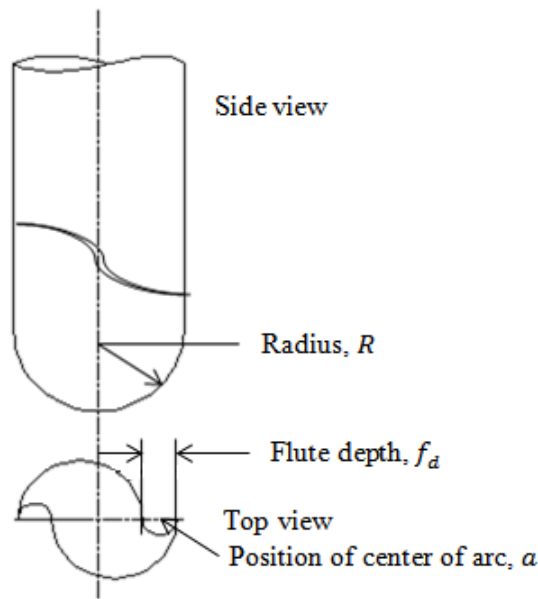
Geometry of a fluted ball-end milling tool [4]
